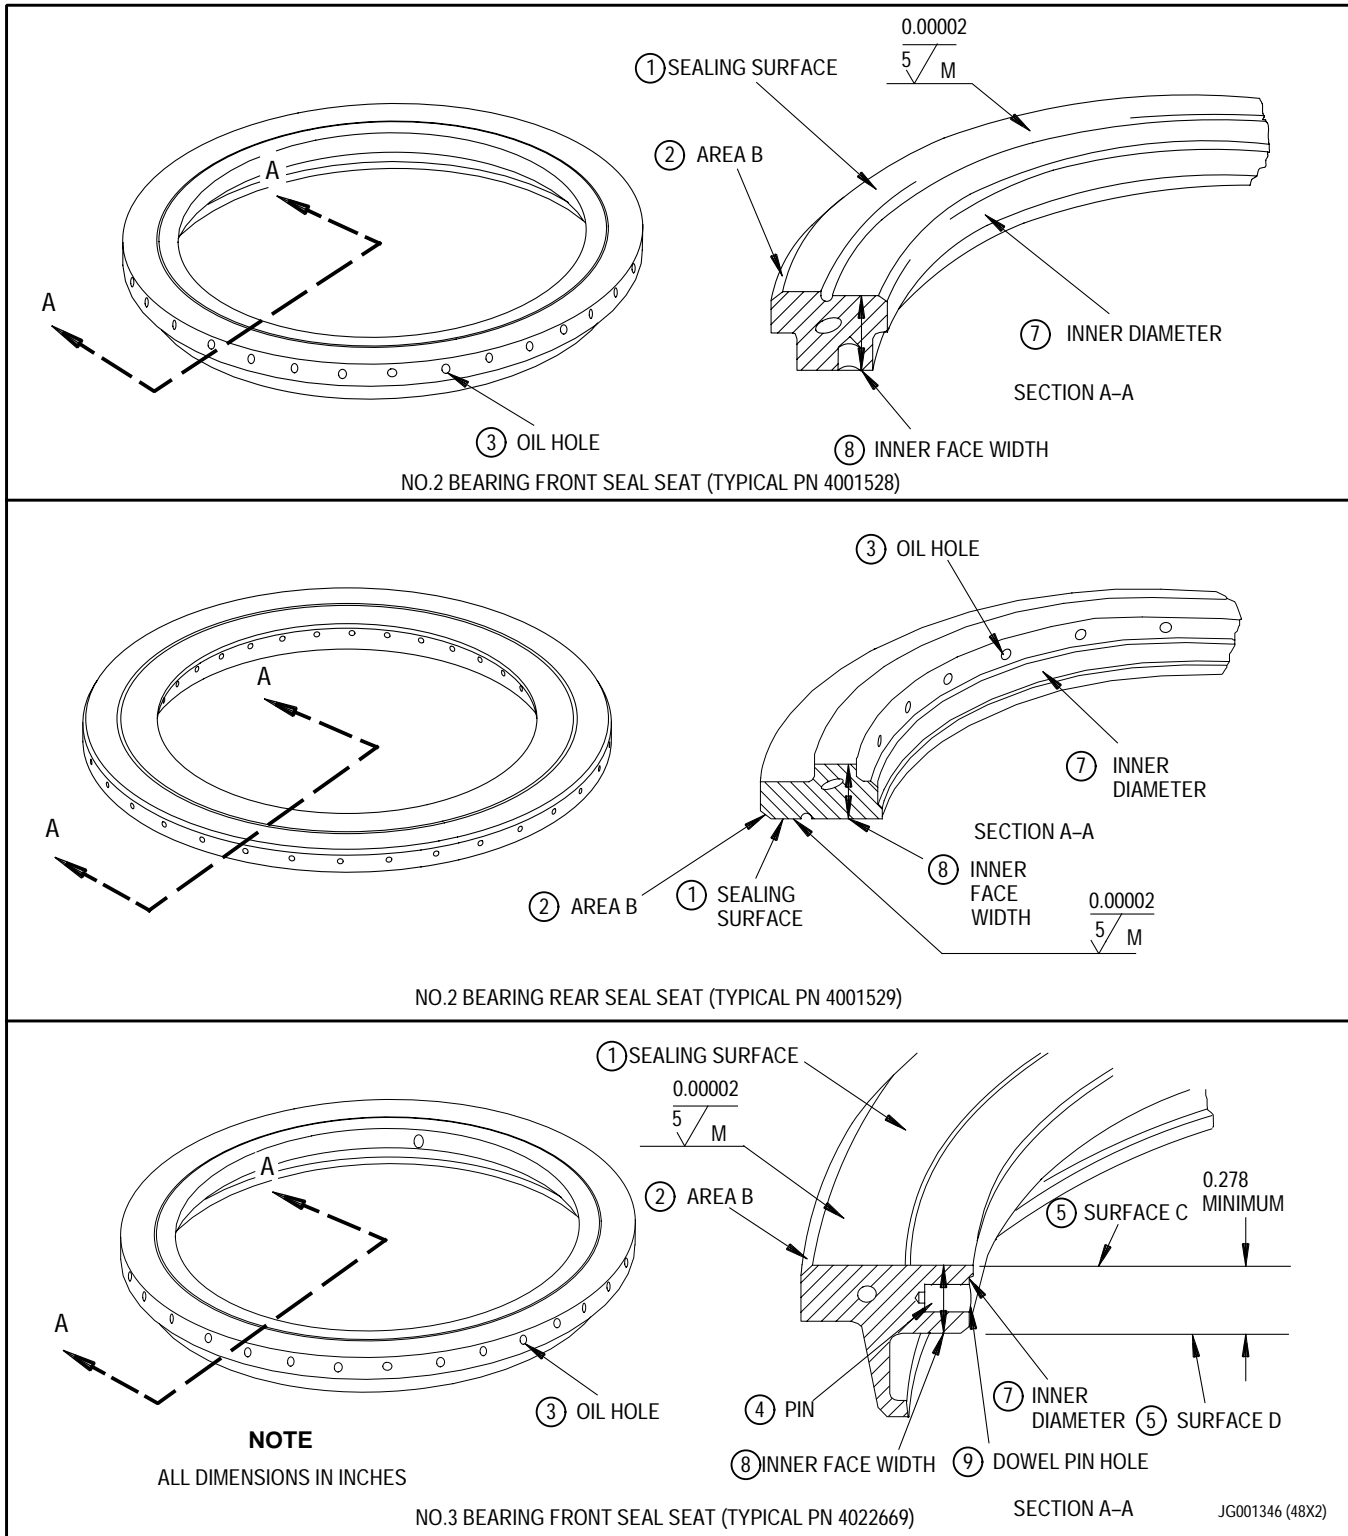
No. 2, 3, and 4 Bearing Seal Seats - Inspection (Sheet 1 of 2)
